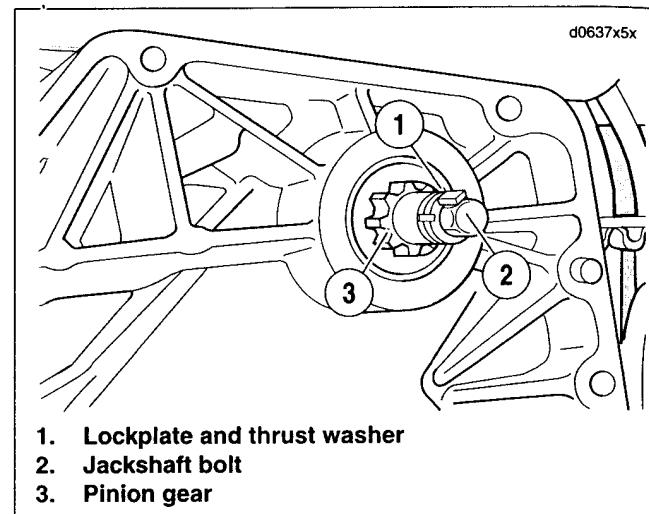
Primary Chaincase and Jackshaft Assembly
